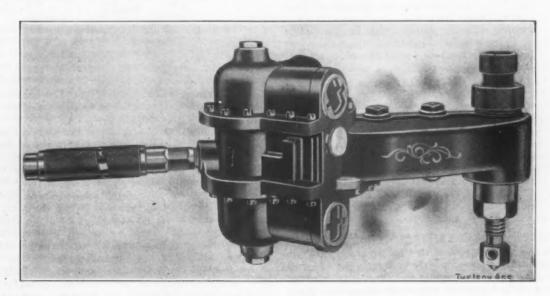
The Little Giant Pneumatic Drill for Corner Work, Made by the Chicago Pneumatic Tool Company.
